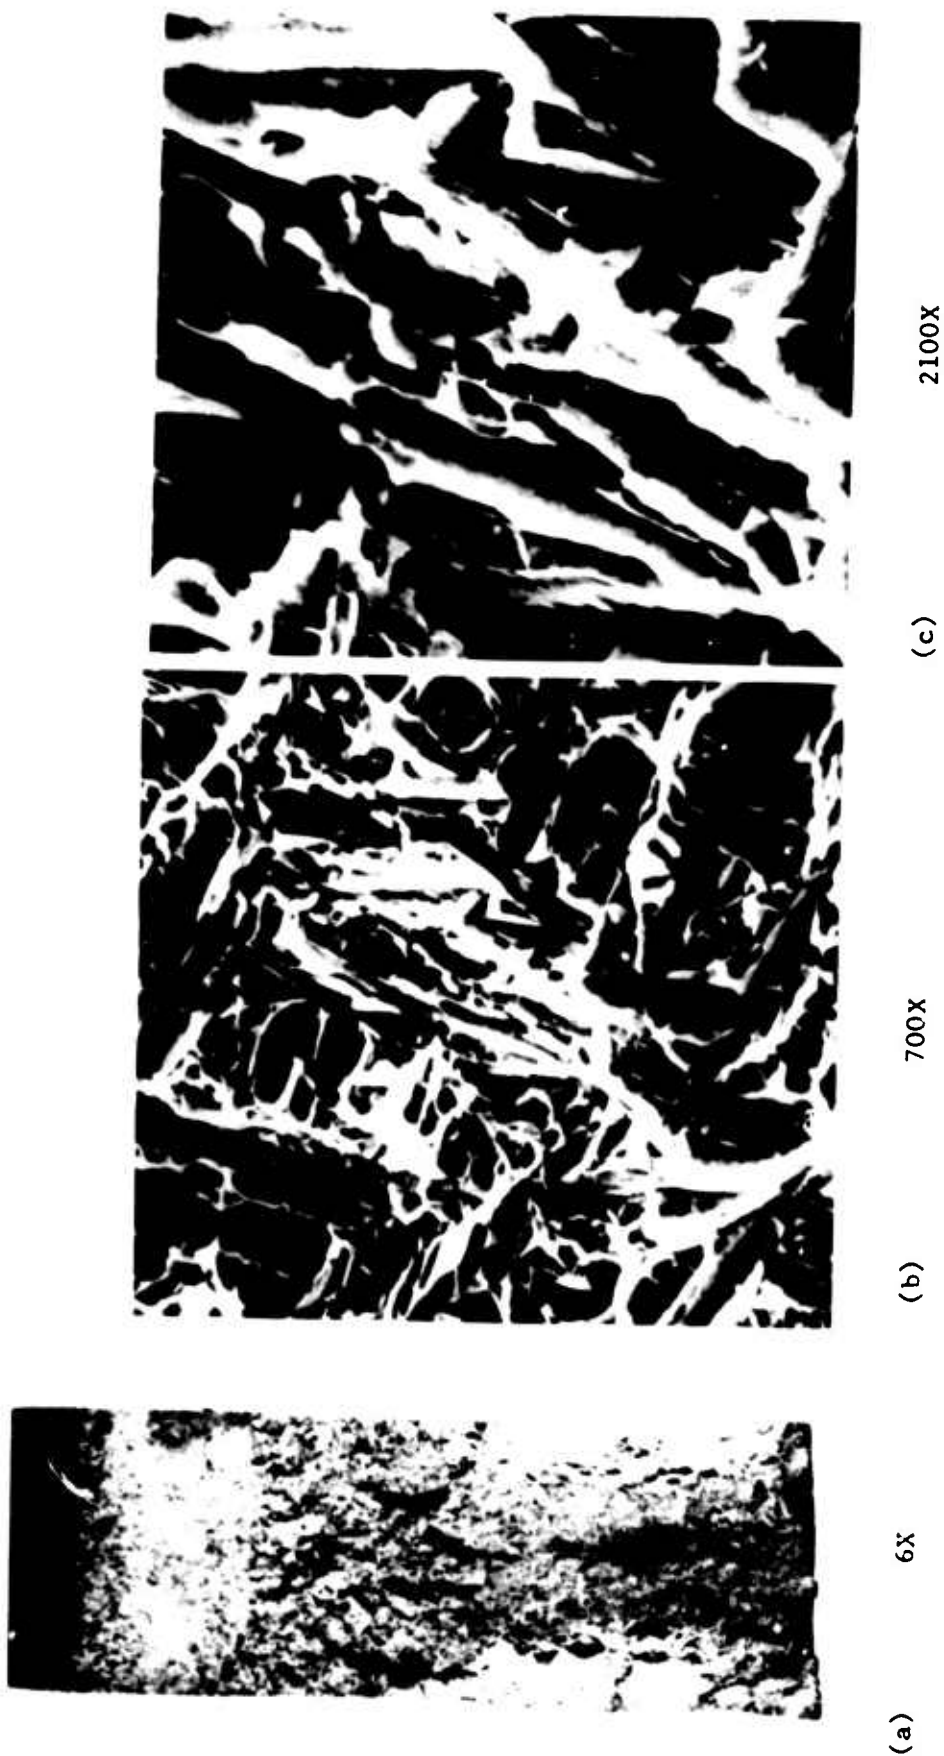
FRACTURE SURFACE OF A SYNTHETIC HEAT-AFFECTED ZONE SPECIMEN COOLED AT 25F/SEC, HEAT TREATED AT 1600F FOR 2 HRS AND STRESS-CORROSION TESTED
